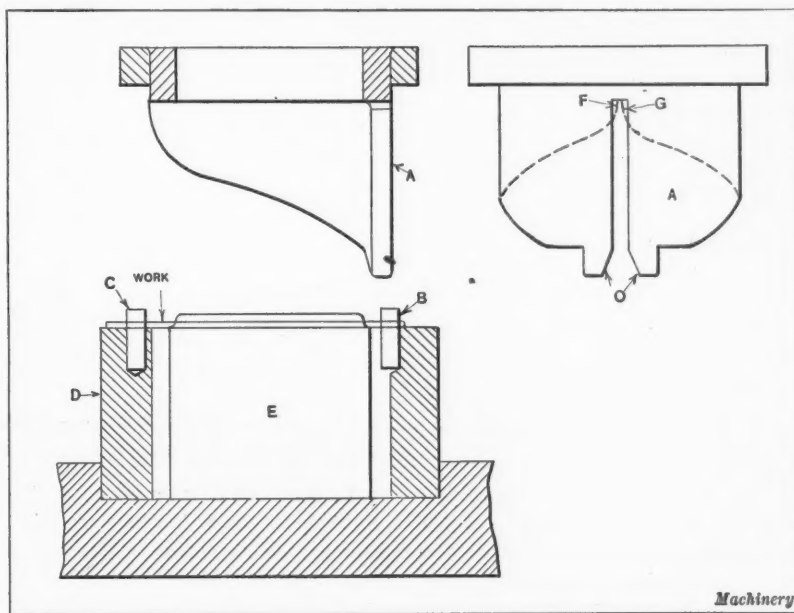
Design of the Punch Press Tools used in forming the Large Ring
